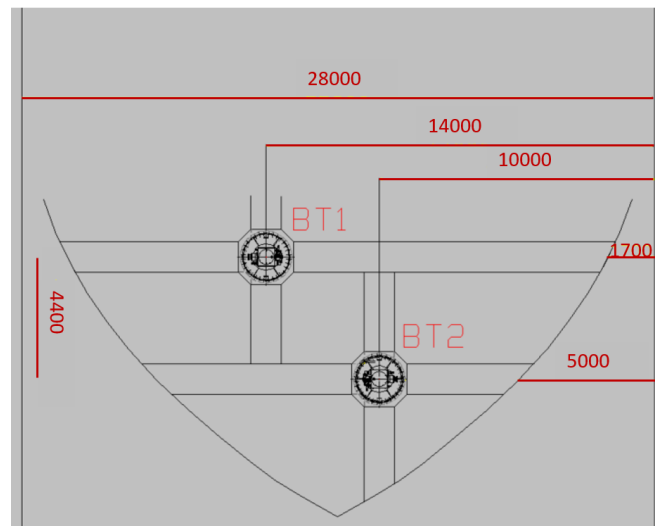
Position bow thruster with dimensions in mm (top view)
